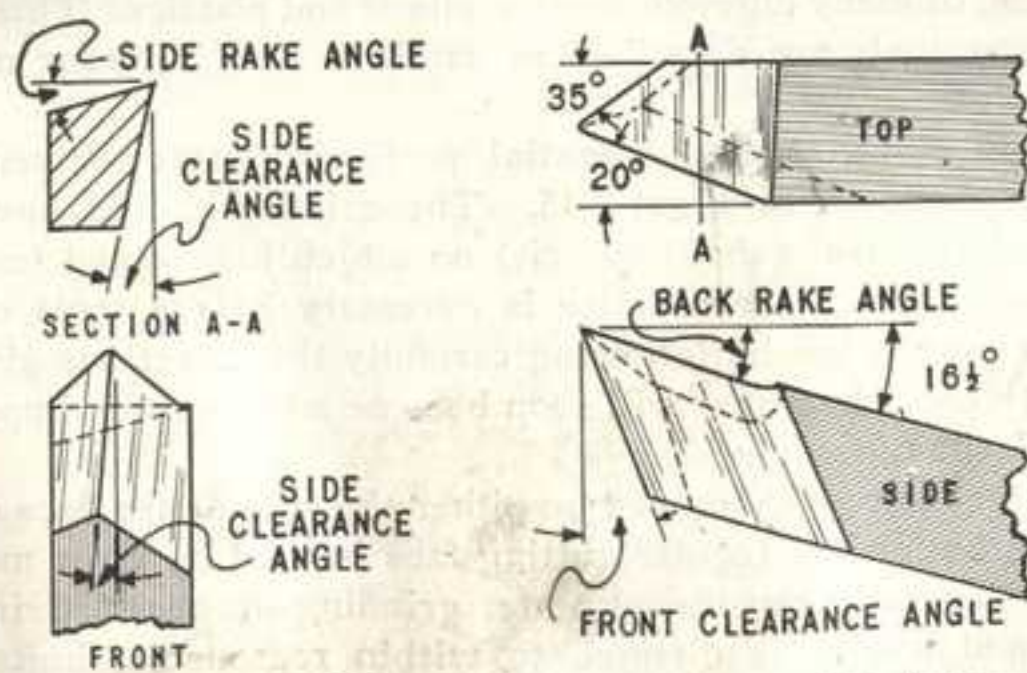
Excellent R. H. Tool for general turning and shouldering toward headstock; also facing. Point should be rounded for finishing work.
